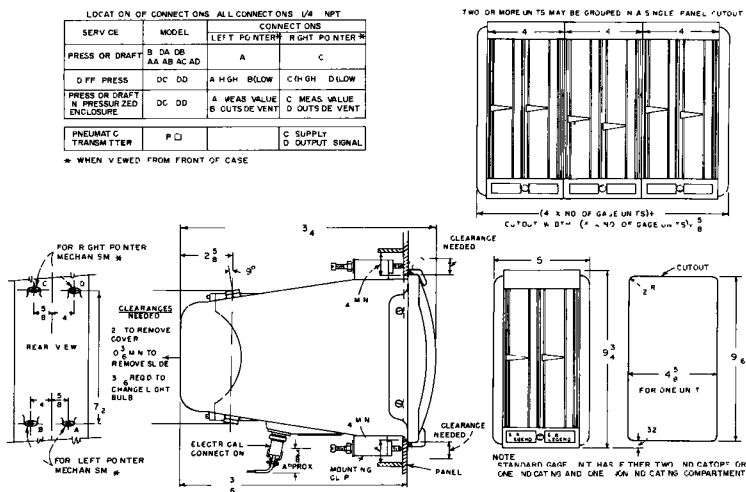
Mounting Dimensions for Flush Mounted Type PG Gage
